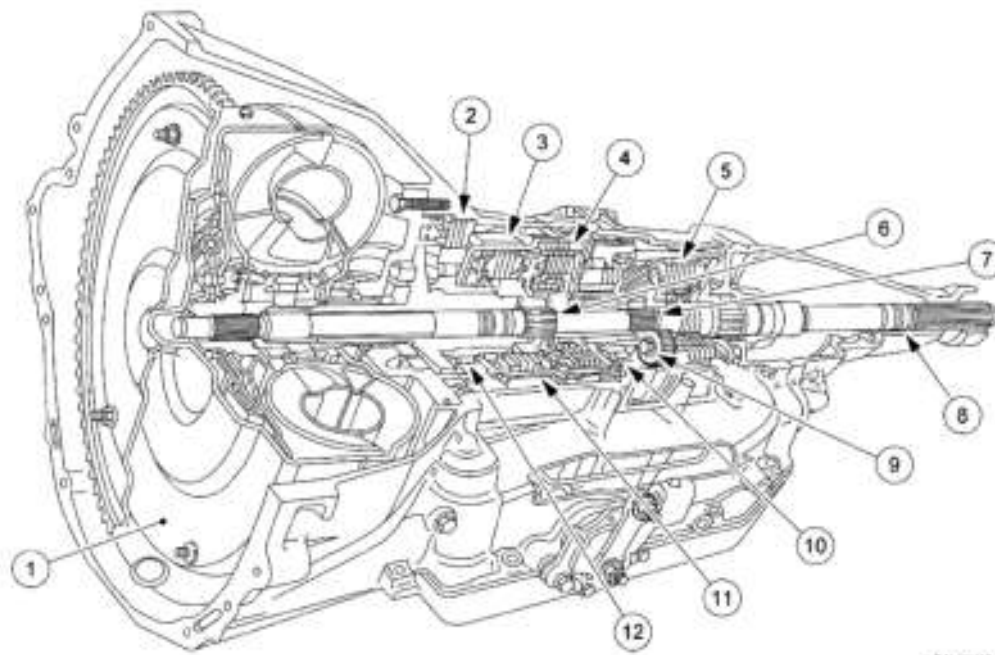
Identifying Seals, Rings And Gasket Location (1 Of 2)
